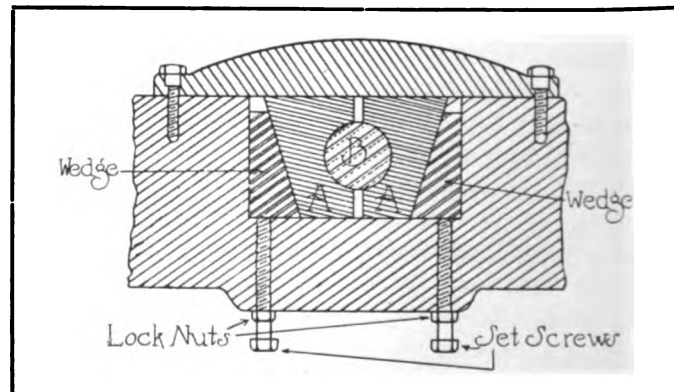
Showing the Main Bearings of Maxwell Two-Cylinder Car and Components Utilized in Eliminating Play.
